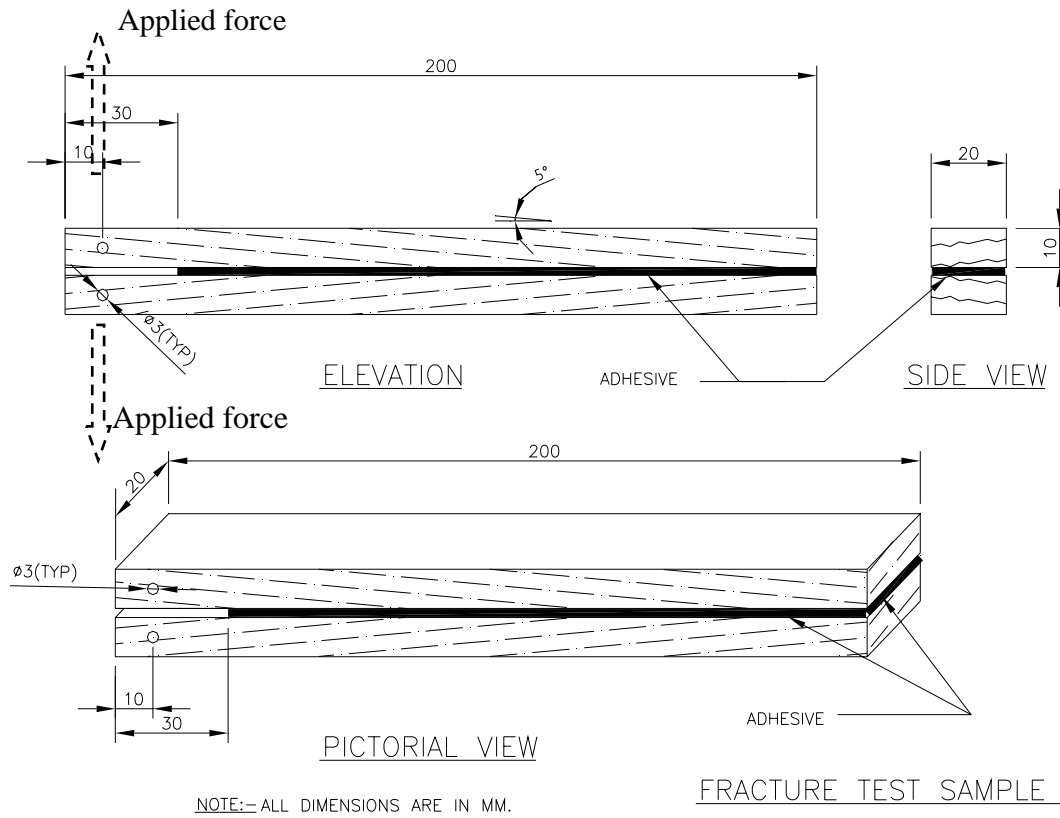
Dimension of fracture cleavage test specimen for Mode I fracture.
